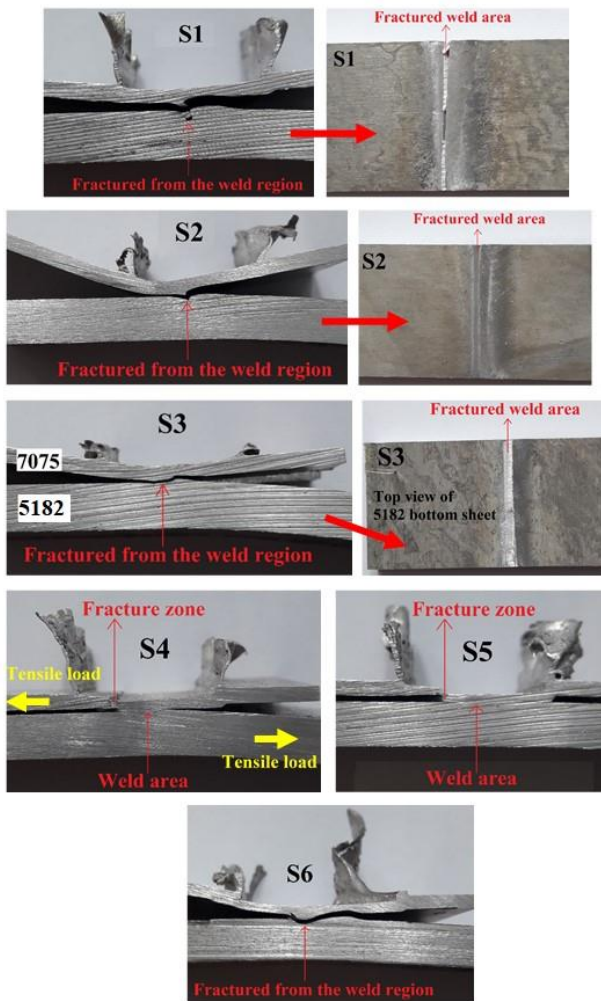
Photographs of the fractured welds during tensile testing
